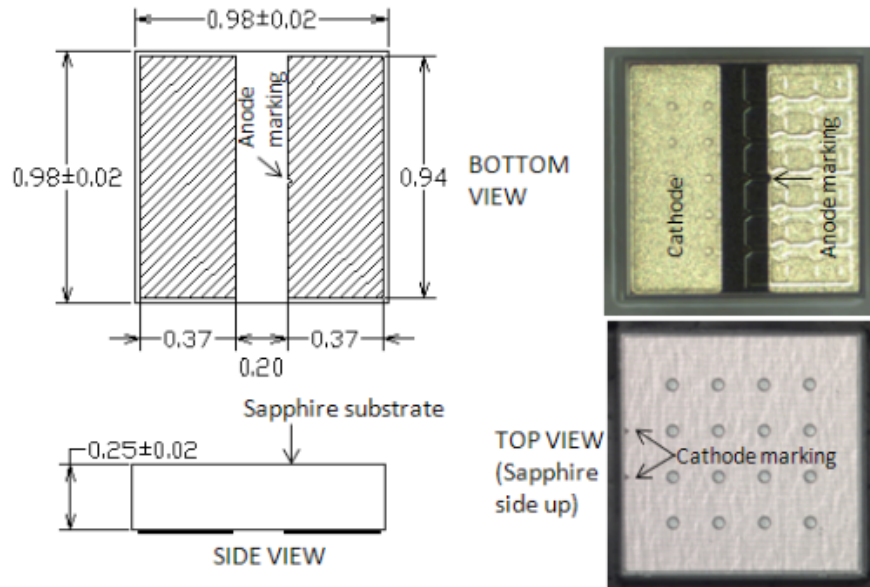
Mechanical dimensions for LUXEON FlipChip Royal Blue L0F2-Bxxx100005501.
